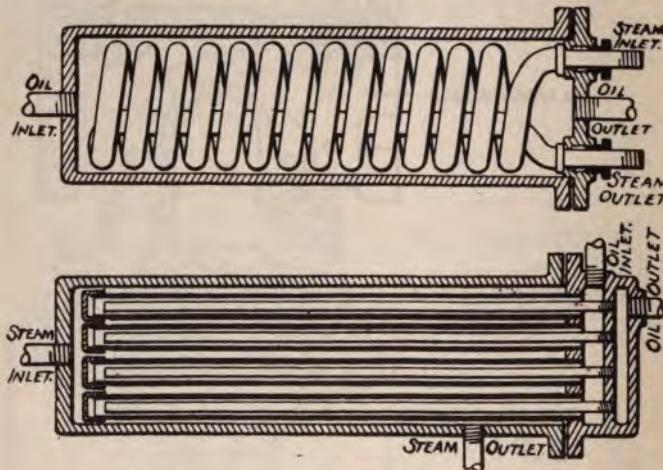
Condensing Type of Heater, Showing Detail of Coil.
